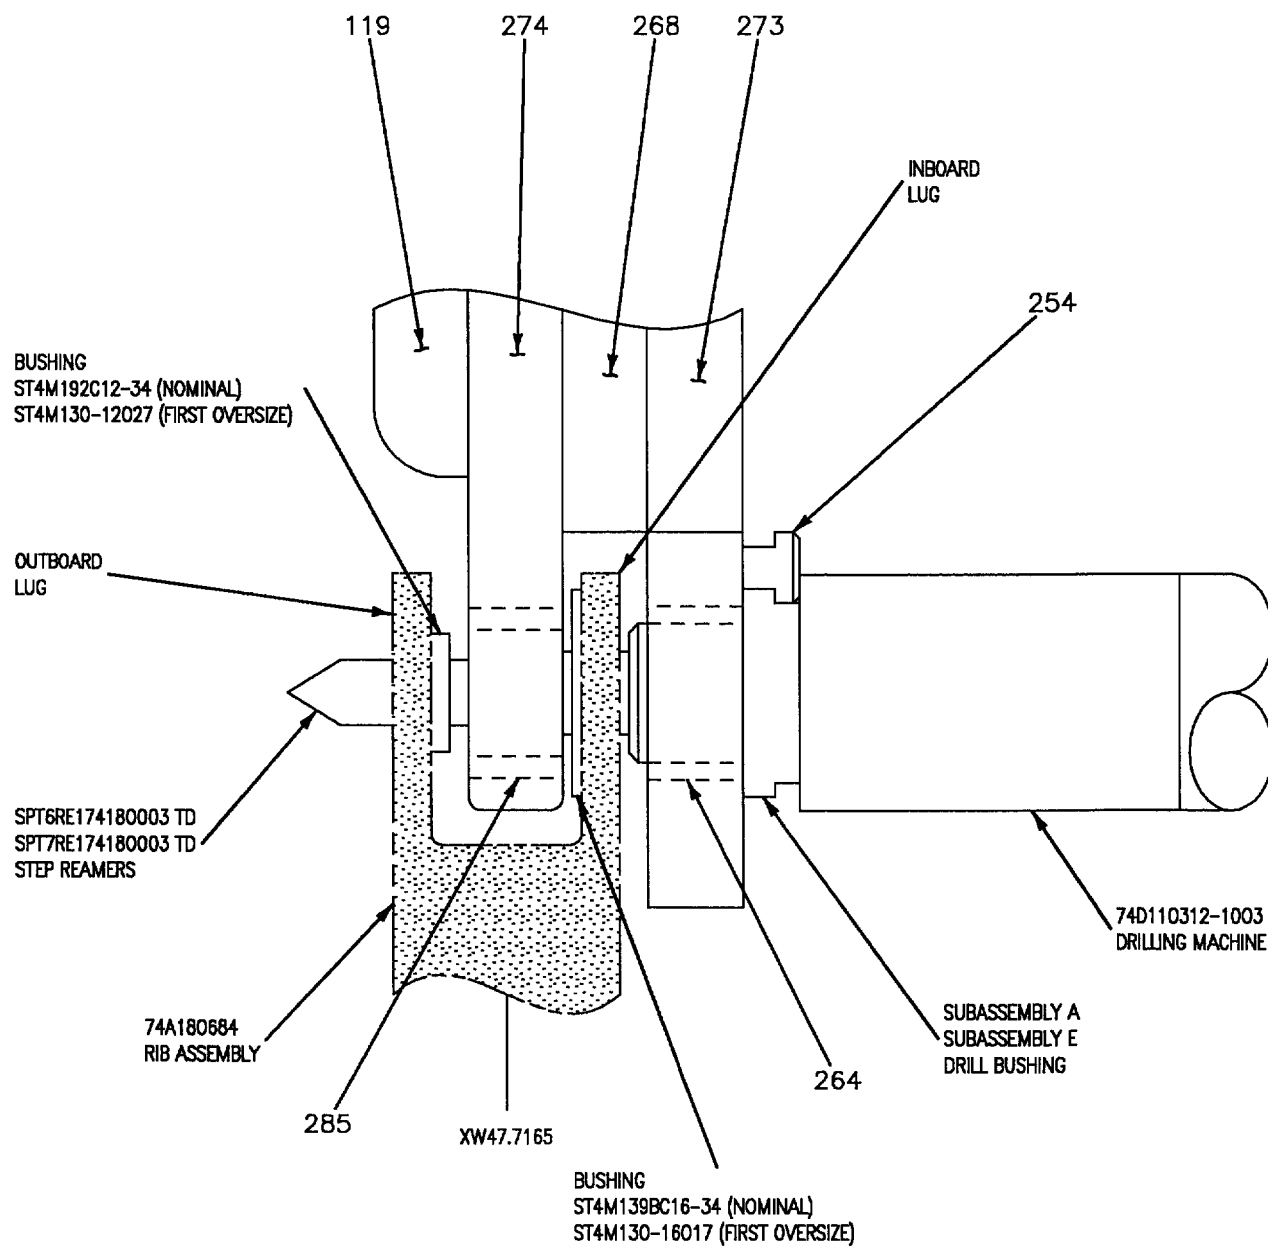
Bushing Replacement At 74A180684 Rib Assembly (Sheet 1)
